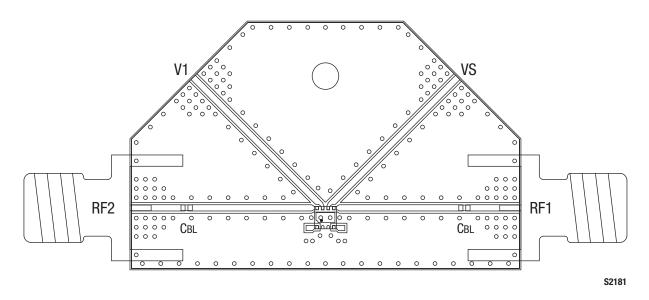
SKY13347-360LF Evaluation Board Assembly Diagram
